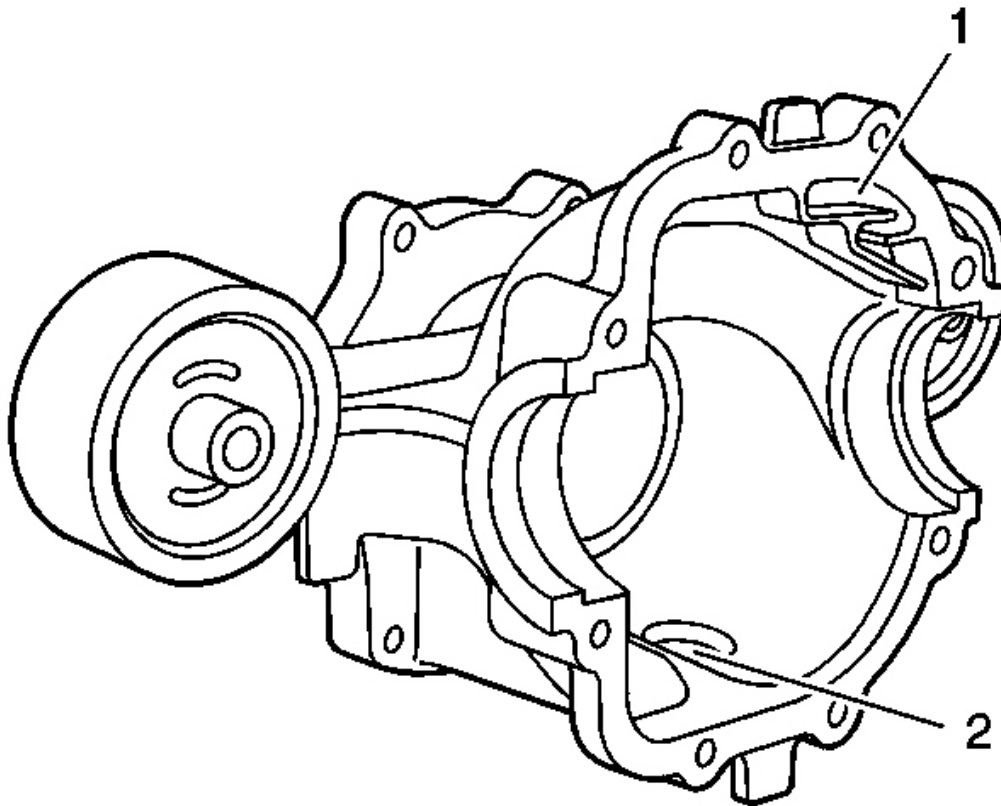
Cleaning Vent Passage & Oil Return Passage
